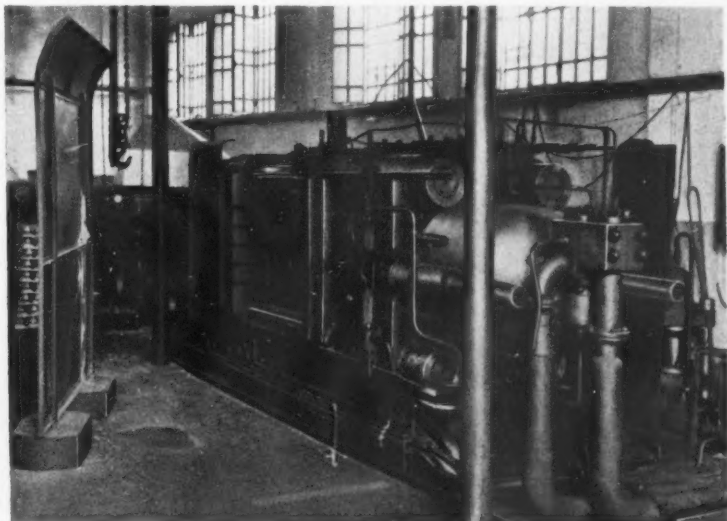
In this General View Inside the Fonderpress Works is Seen a Triulzi Direct-hydraulic Machine, which is Capable of Exerting a Die-closing Force of 1,000 tons
